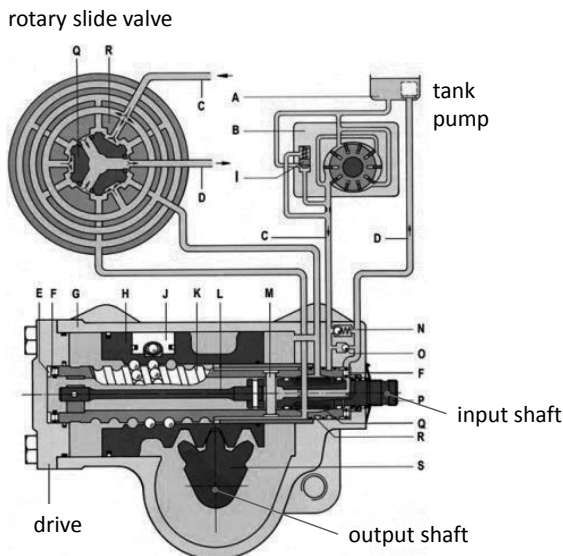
Ball-and-nut-type steering gear with hydraulic assistance [8]
